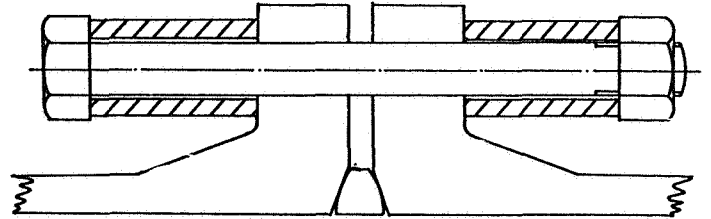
Longer bolts and sleeves allow considerably more flange movement.
